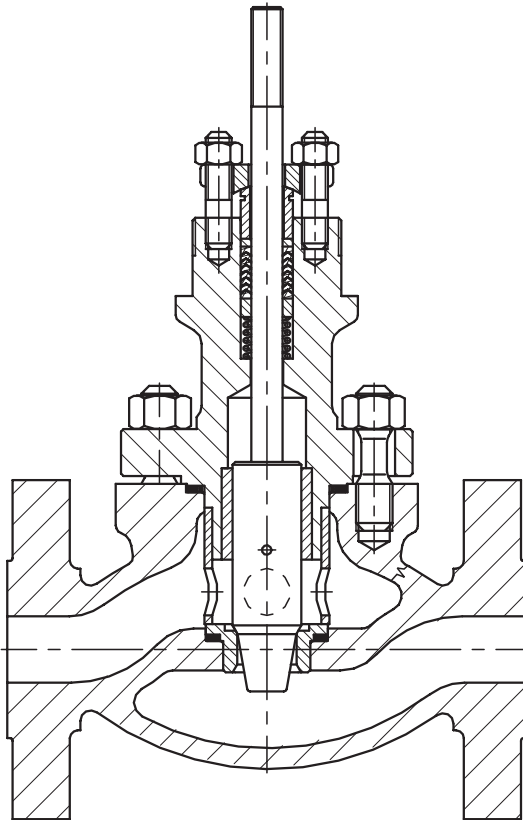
Valve Z1A - contoured valve plug and compression cage
